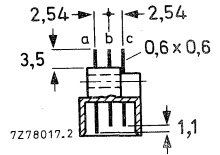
Straight dip-solder pins, with protruding earth contacts.
